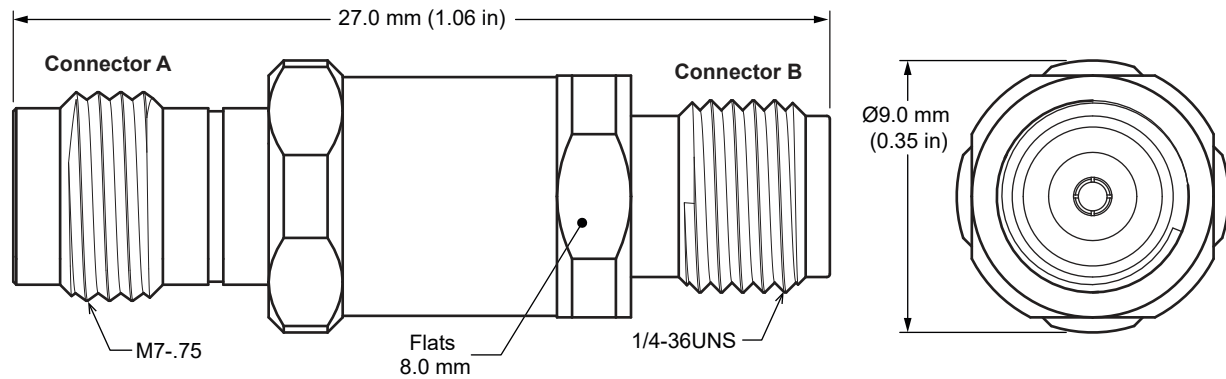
Product Dimensions for the ADP-2.4F-2.92F Adapter
